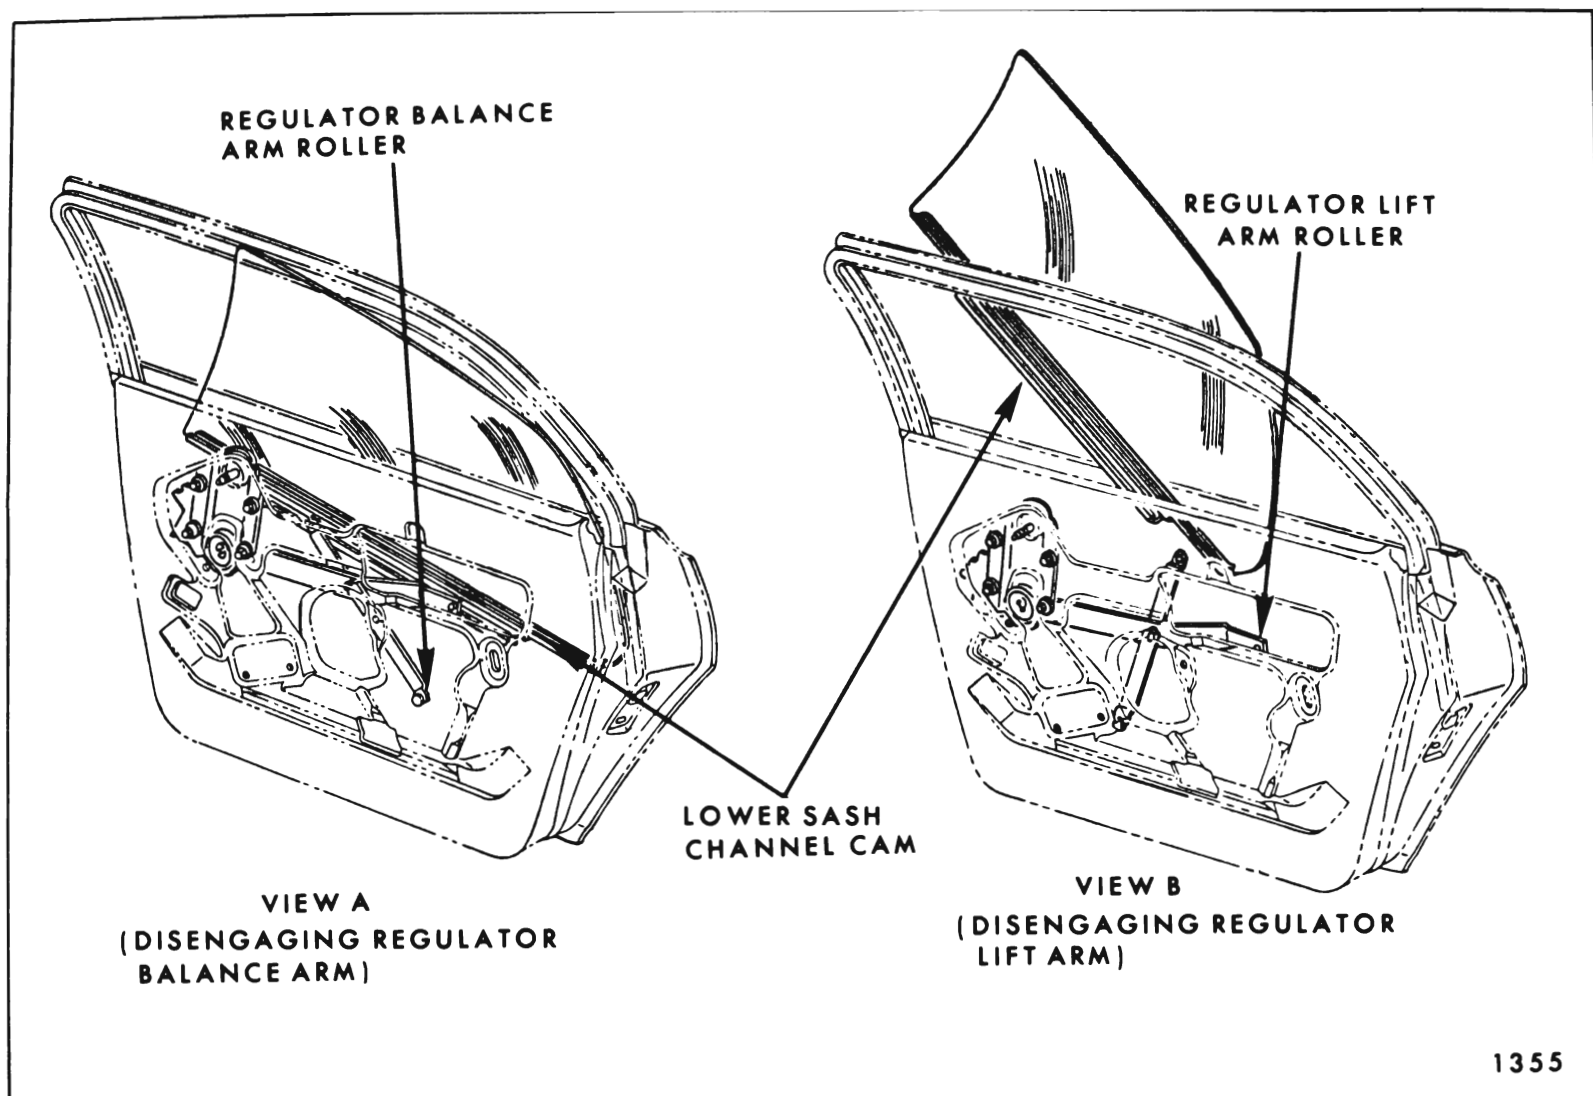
Rear Door Window Removal - "A" Closed Styles
